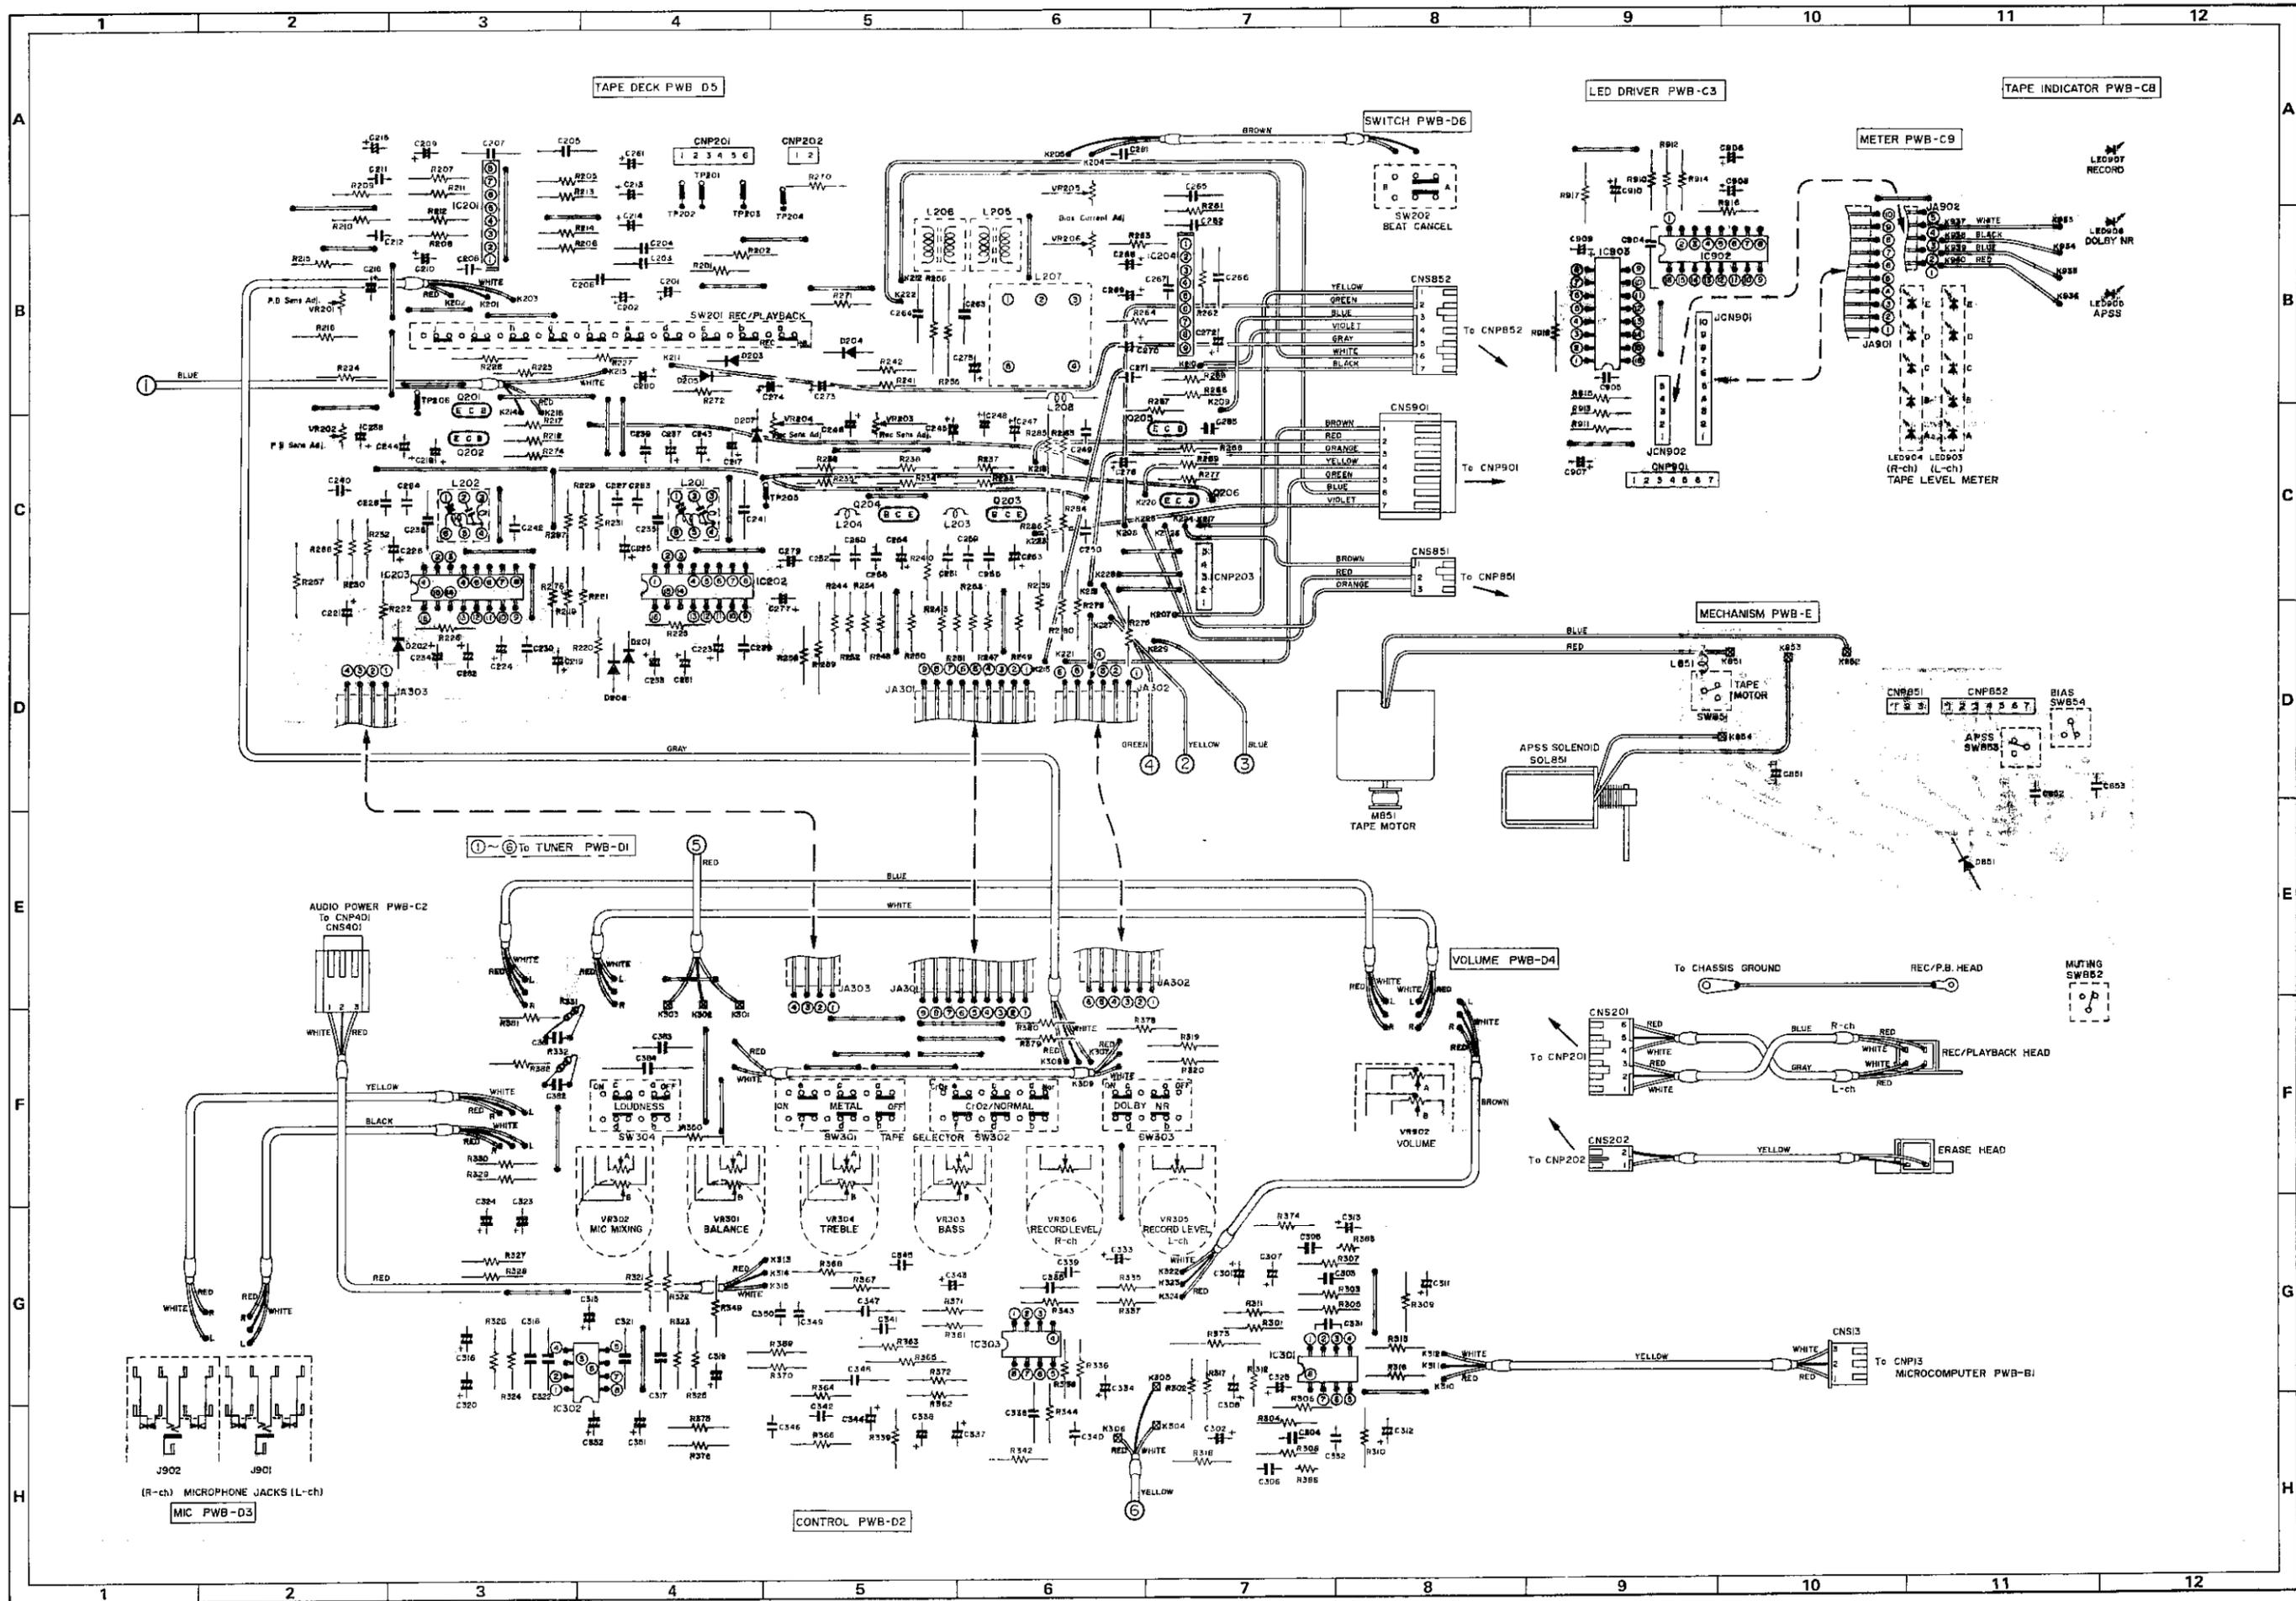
WIRING SIDE OF P.W. BOARD (2/3)
